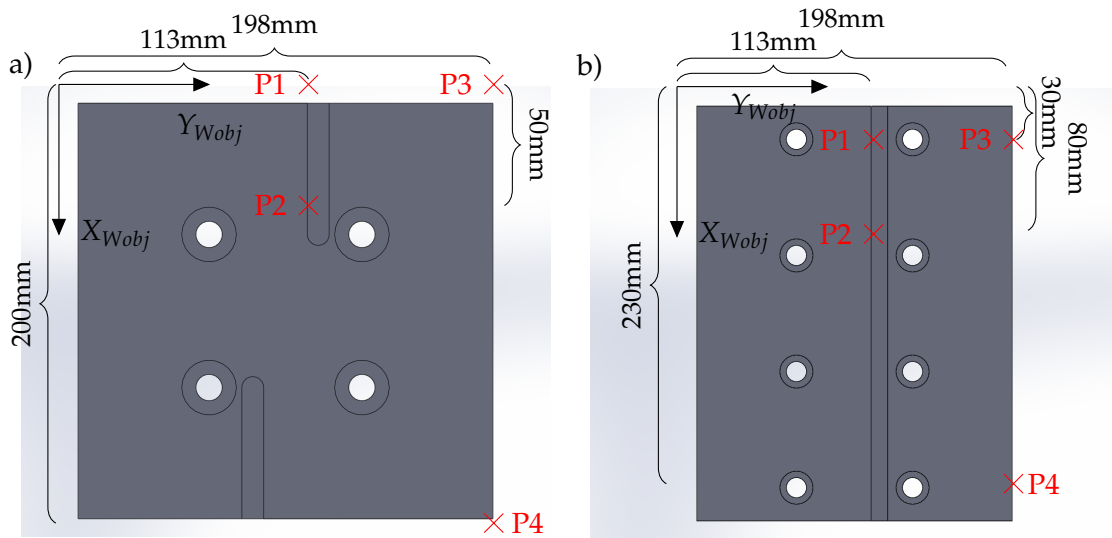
Top view of Acetal Co-polymer workpieces in CAD a) Square b) Rectangle
